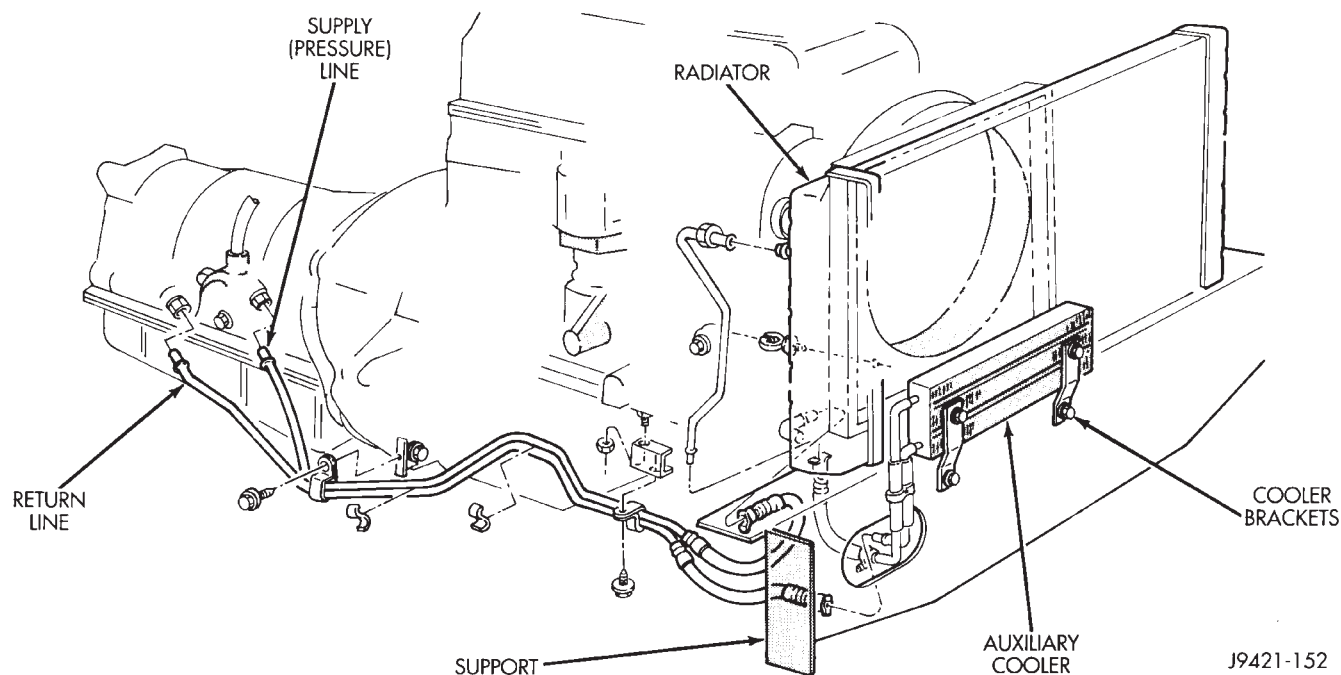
Auxiliary Cooler Mounting (Right Hand Drive)
